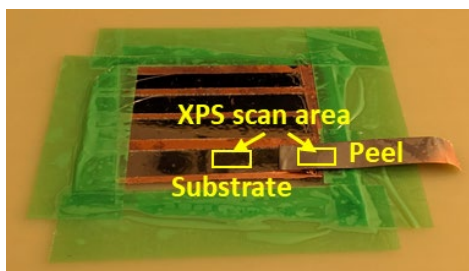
Photograph of a peeled copper film showing how the fracture surface of both the “peel side” and “substrate” side can be examined.
